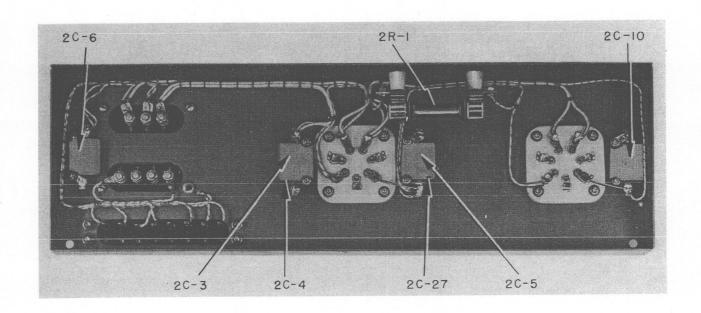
RF Driver 813 Tube Chassis (Bottom).
